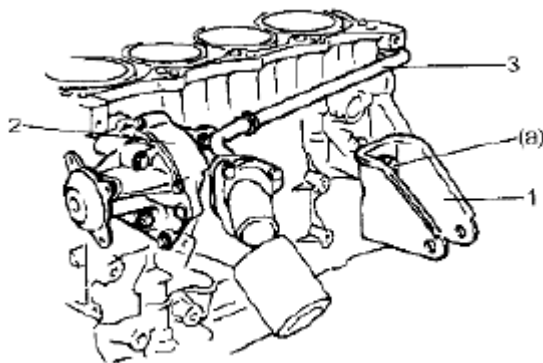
Identifying Water Pump & Heater Outlet Pipe
